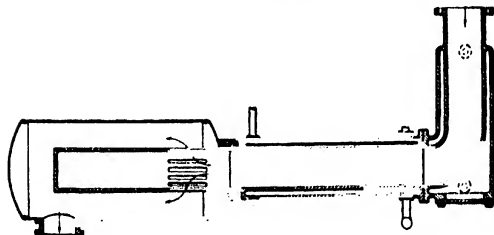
Water-Jacketing Exhaust Pipe with Slits Opening into Muffler for Reducing Noise of Exhaust
